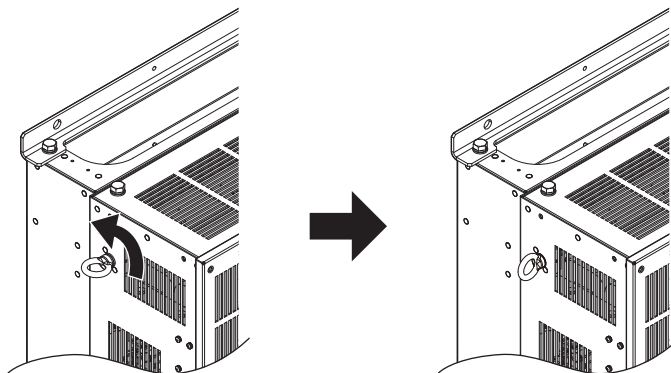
Adjusting Angle of Eye Bolts (Model 2A0432)
